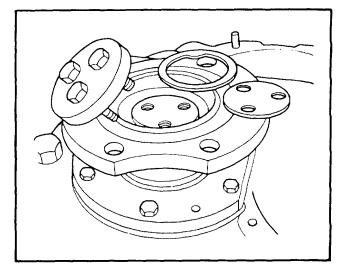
Output flange retainer washer and lathe cut ring removed.
